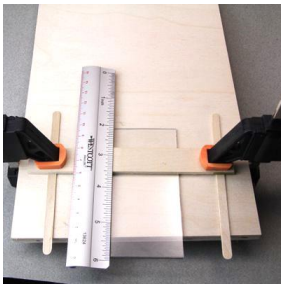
Bending Jig A simple bending jig created from 2 clamps, a piece of wood as the straight edge, and 2 pieces of wood the same thickness as the Plexiglas as spacers. (Shepherd, 2017)
